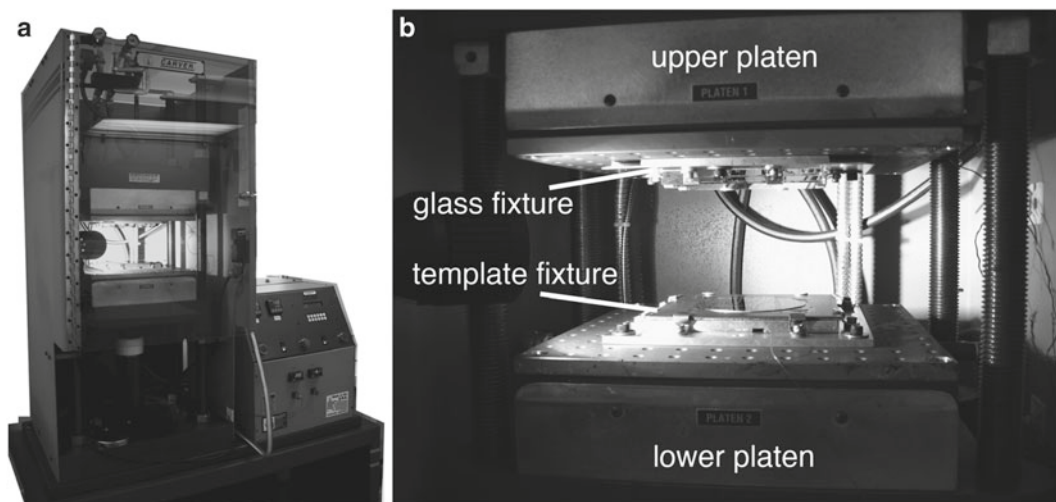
(a) Carver Auto Four hot-press used for hot embossing. (b) Details of the platens showing configuration of the upper glass and lower template fixtures.
